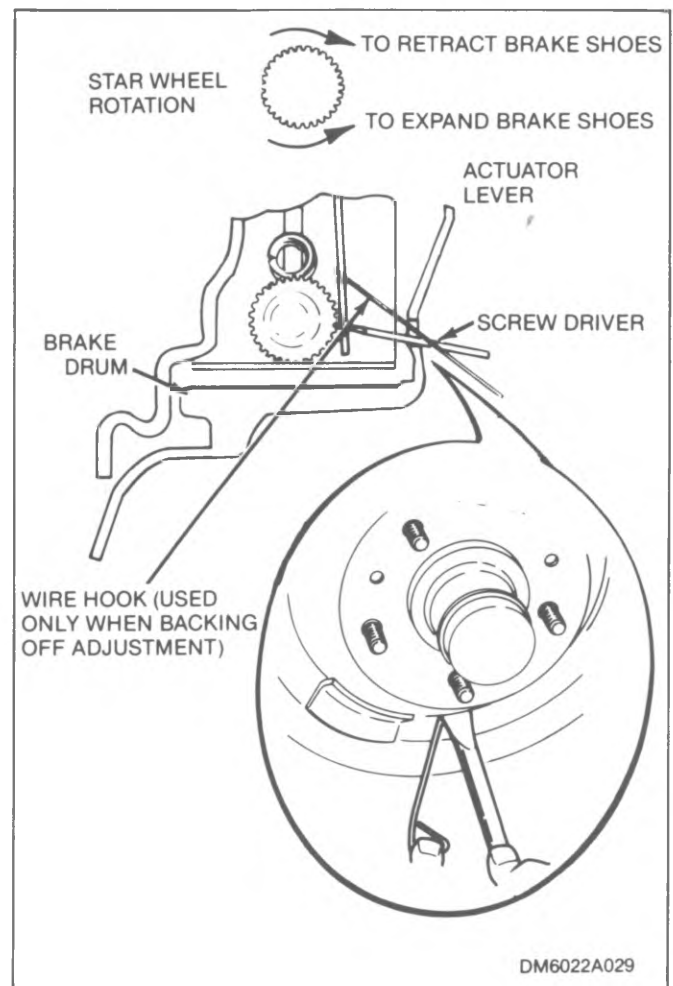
Manual Adjustment Through Brake Drum—Release Actuated Adjuster
